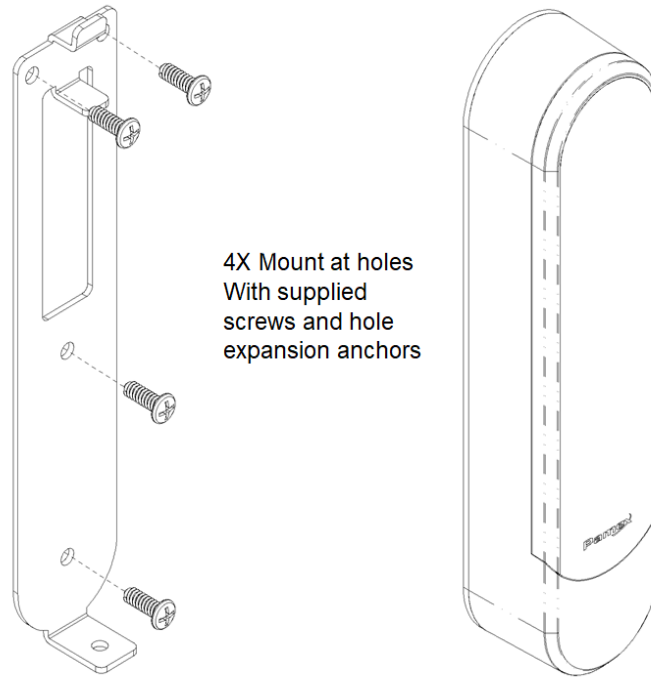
Enkore Smart EKS-WR1N Surface Mounting
